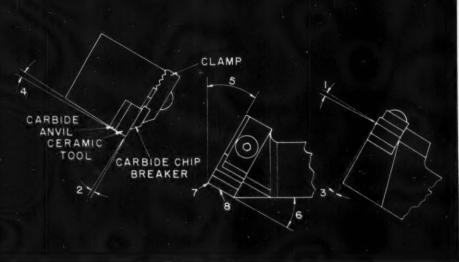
Mechanical ceramic tool-holder. Key to tool-angle nomenclature: (1) back-rake angle; (2) side-rake angle; (3) end-relief angle; (4) side-relief angle; (5) end cutting-edge angle; (6) side cutting-edge angle; (7) nose radius; (8) cutting edge.
